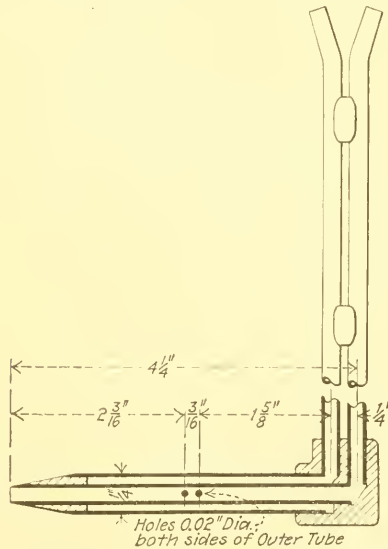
DIMENSIONED SKETCH OF PITOT TUBE Y
